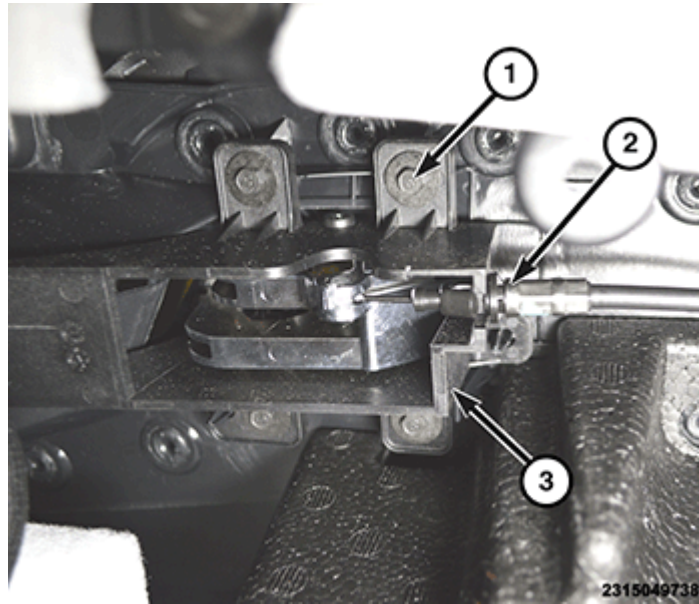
Bolts, Door Latch Release Cable & Interior Door Handle
